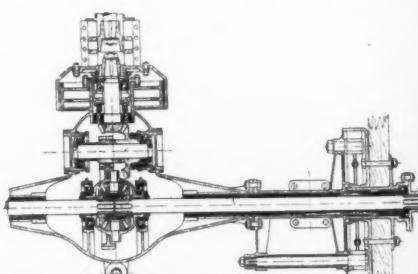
Drawing to Show the Generator Arrangement of Back Axle With Double-Reduction Bevel Drive
